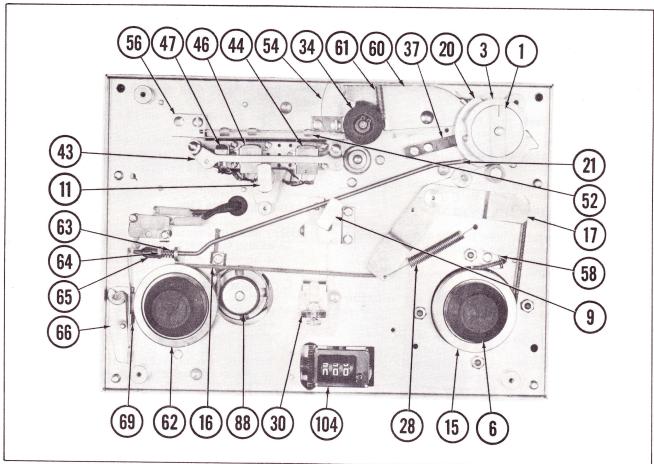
TOP VIEW OF MECHANISM WITH ESCUTCHEON REMOVED
